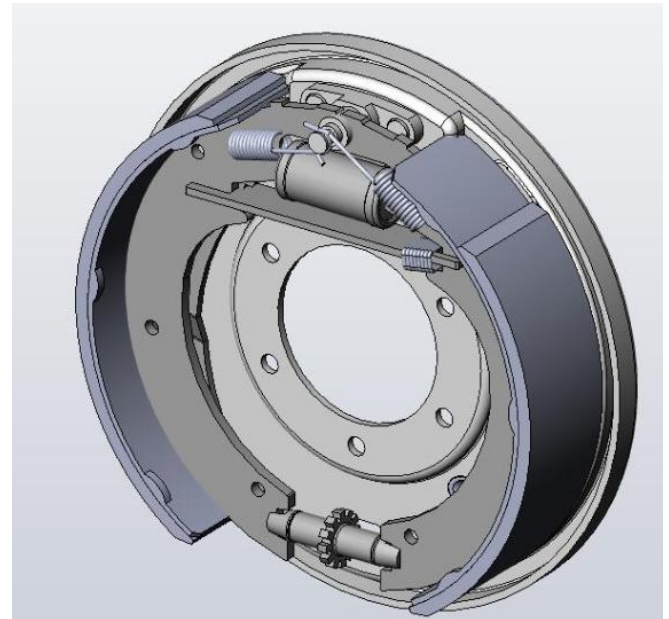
Three-Dimensional CAD Model of the Automotive Drum Brake
